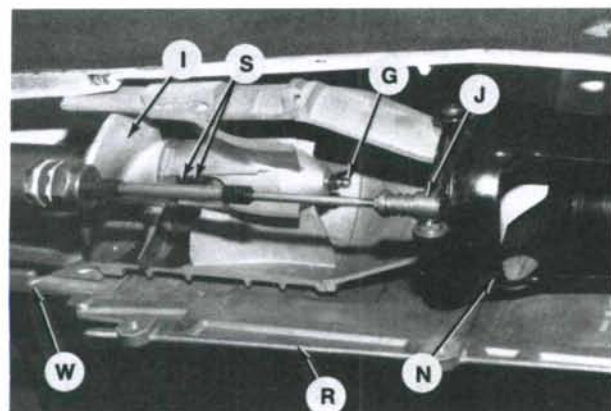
Cutaway view of jet pump assembly and related components.
